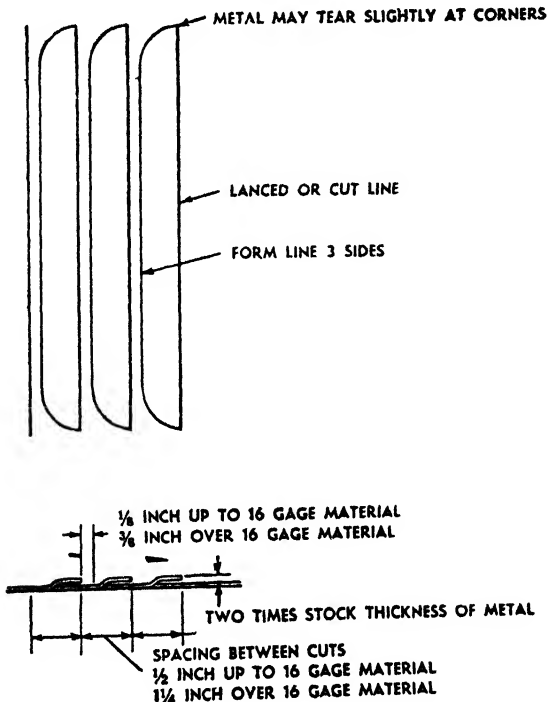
Louvers formed in sheet stock can be lanced at $\frac{1}{2}$ -in. intervals on thin stock, up to about 16 gage. For thicker material $\frac{1}{4}$ -in. spacing is advocated.
